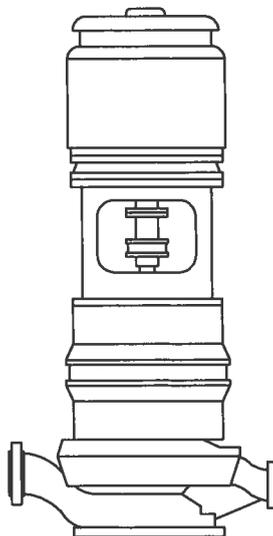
Pump type OH6: High-speed, integral gear driven, single stage, overhung design
